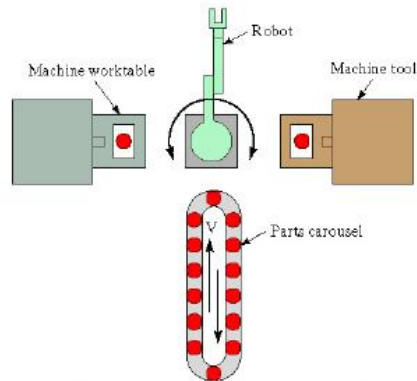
Automated manufacturing cell with two machine tools and robot
